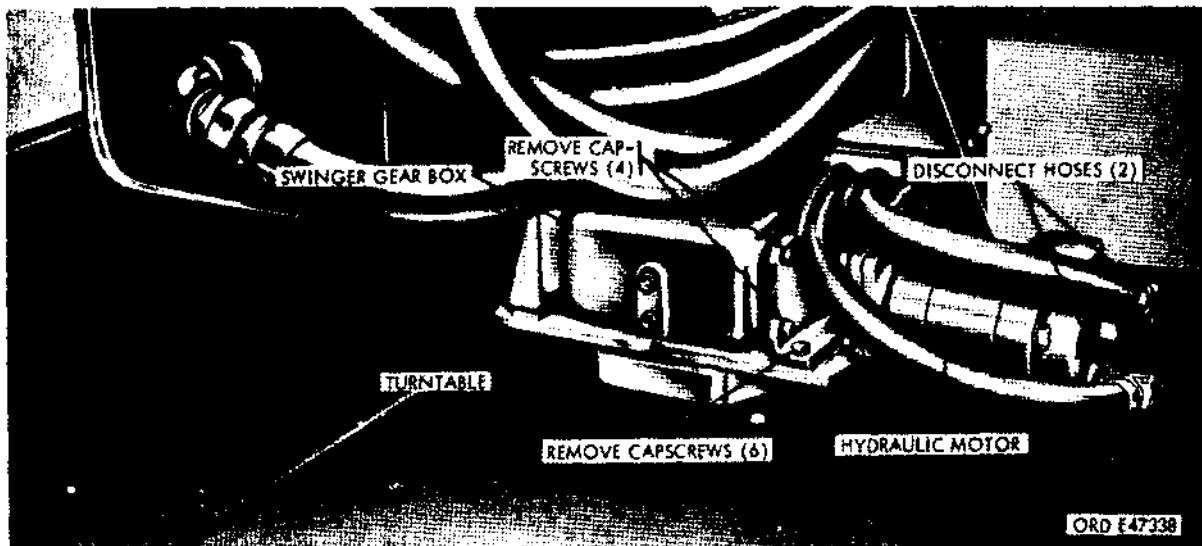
Removing and installing swinger hydraulic motor and gearbox
